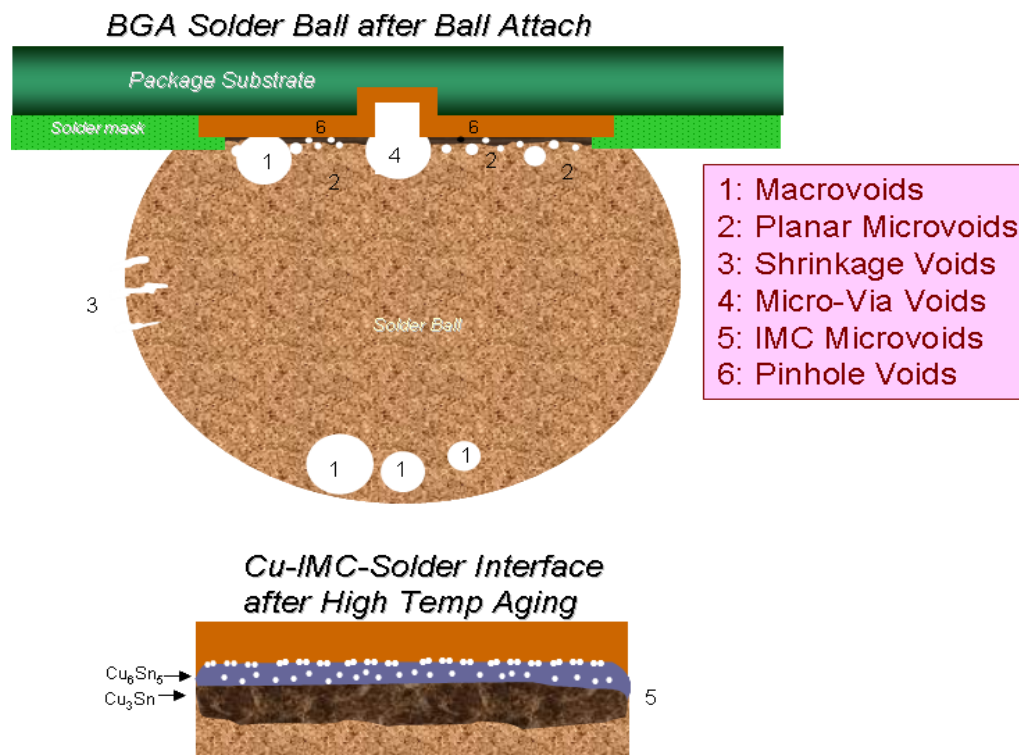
Typical Size and Location of Various Types of Voids in a BGA Solder Joint
